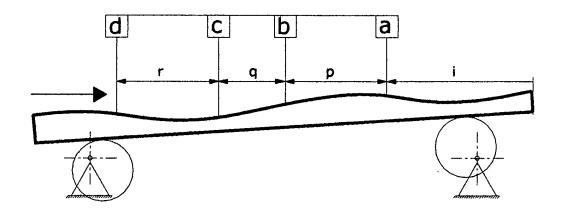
Four-sensor arrangement for one-sided measurements.
